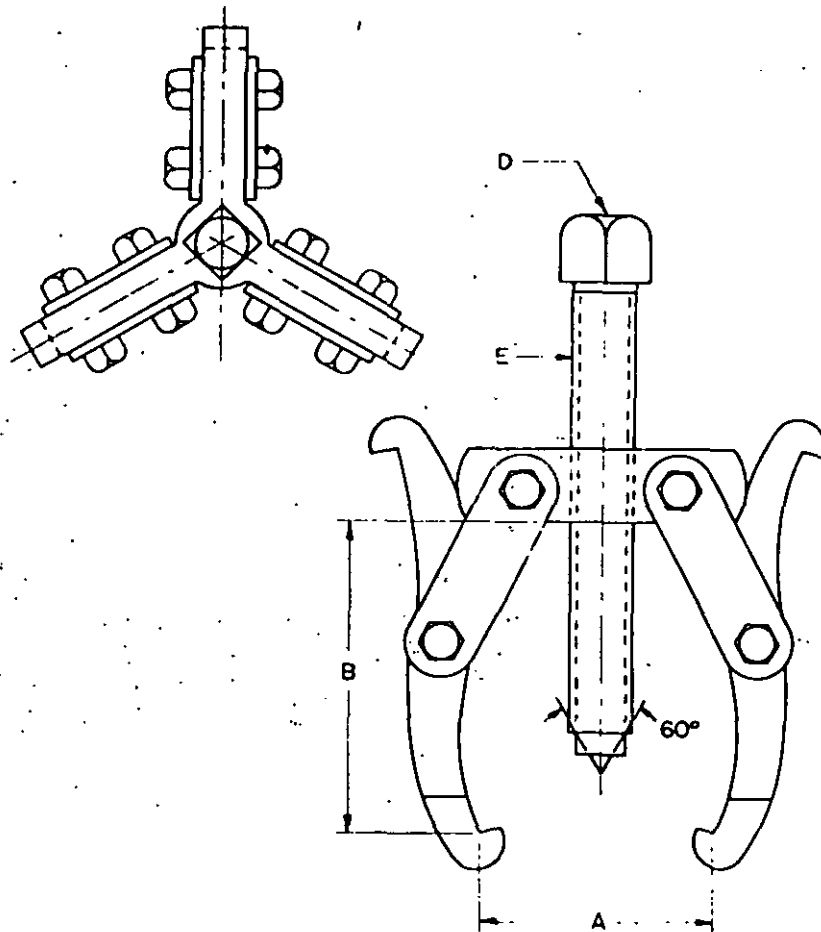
Type I, class 2, style B, miller, mechanical, gear and bearing, three-jaw, external, double end grip.
